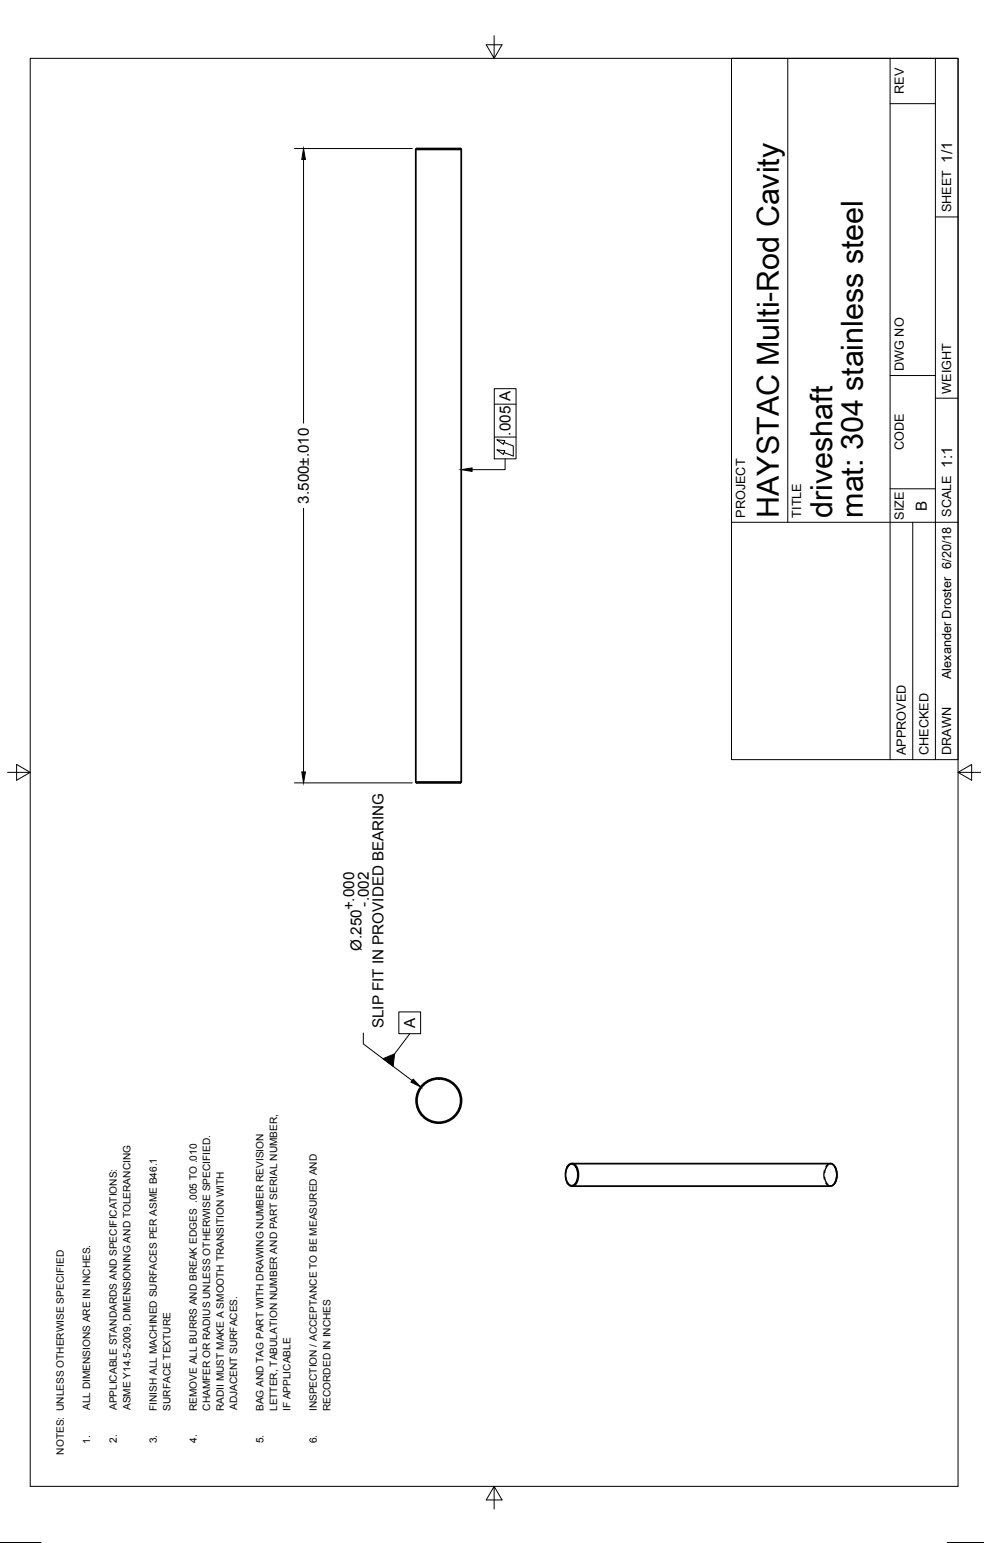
CAD drawing of the driveshaft in the seven-rod cavity.
